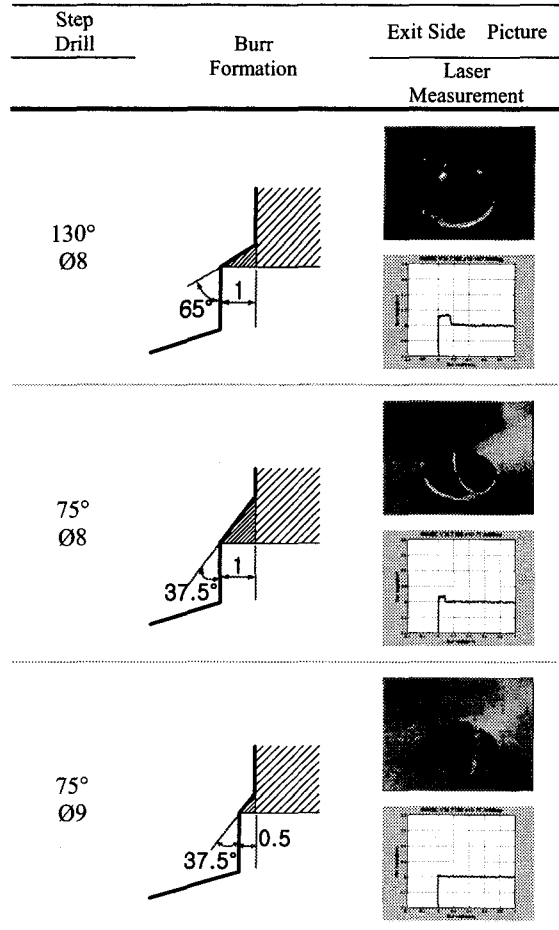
Schematic Illustration of Drilling Process when drill exits with step drill
